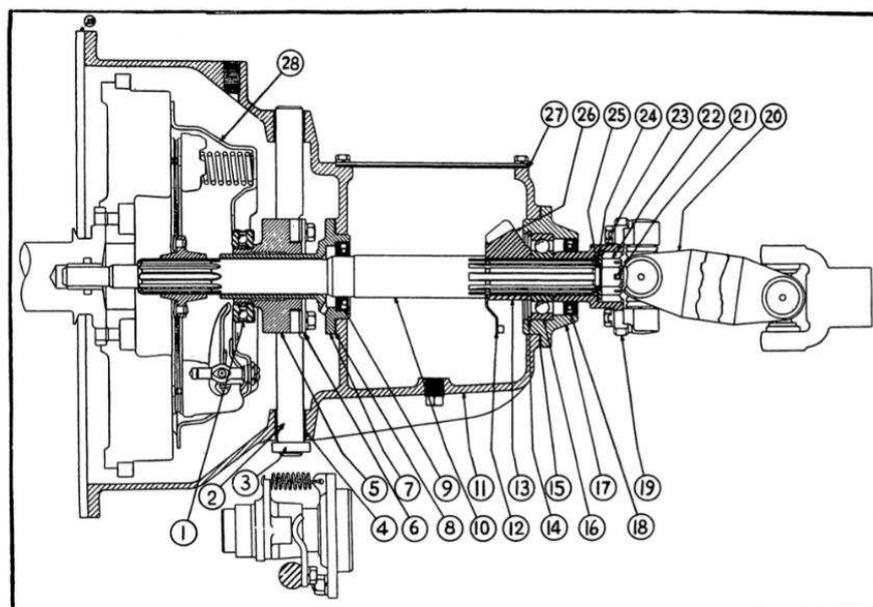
CLUTCH AND BELT PULLEY GEAR HOUSING.
